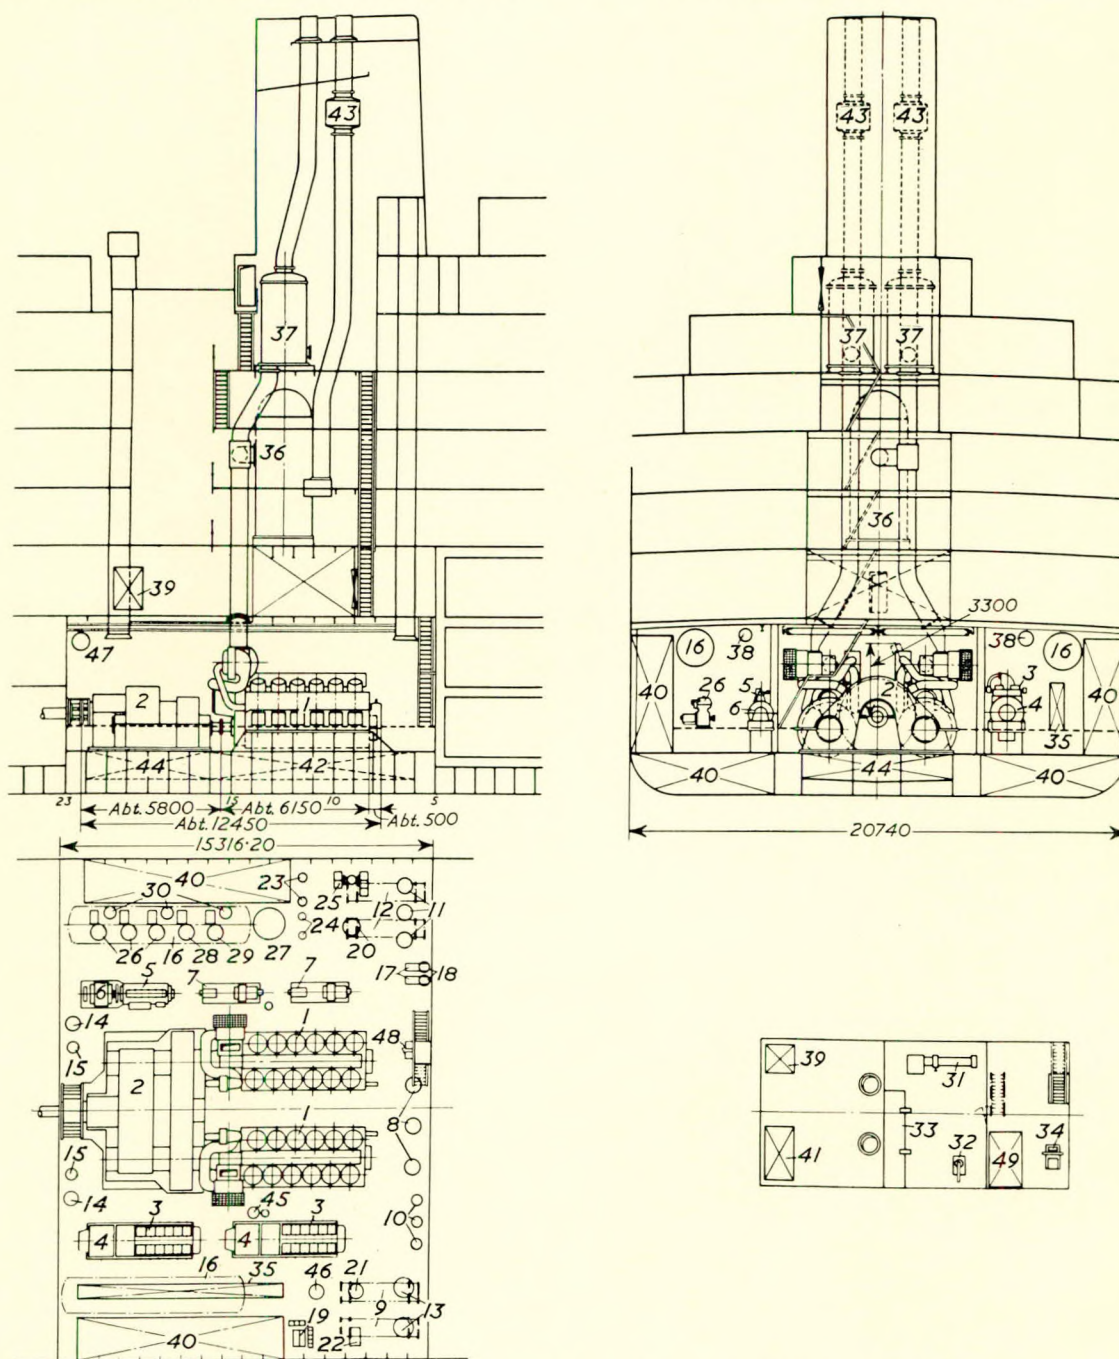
Single-screw geared two-stroke machinery: 10,500 s.h.p., 100 r.p.m.
